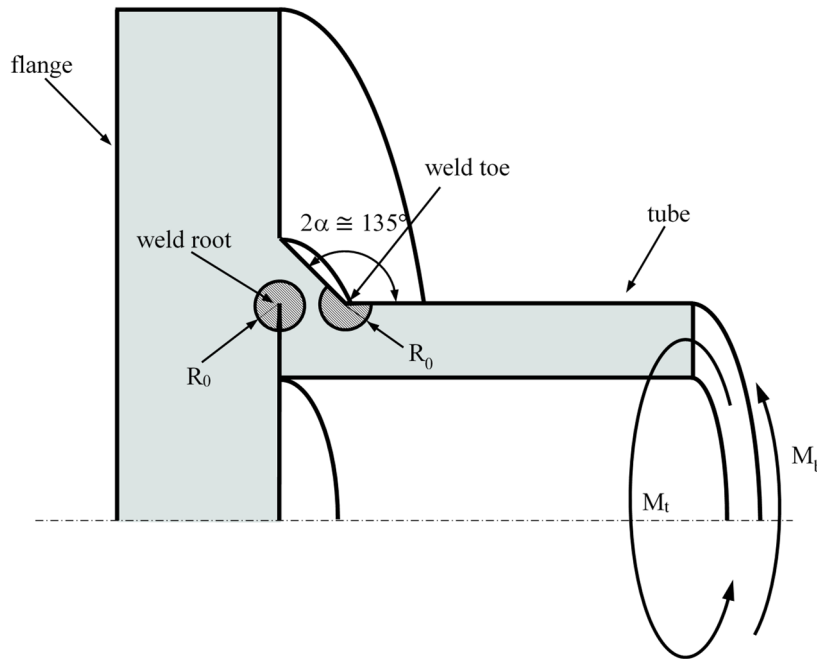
Assumptions of the NSIF-based approach in fatigue design of welded joints with reference referring to a tube-to-flange fillet-welded joint under multiaxial fatigue loading. The sharp V-notch opening angle 2α is typically 0° at the weld root and 135° at the weld toe. [Figure taken from [19]].
